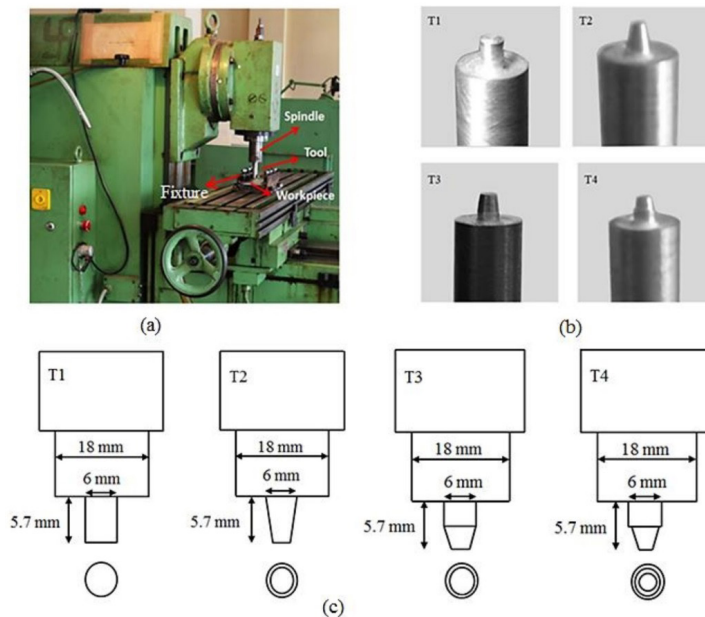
(a) Experimental setup; (b) Tool pin-profiles: Cylindrical pin tool (T1), conical pin tool (T2), cylindrical-conical pin tool (T3), and stepped-conical pin tool (T4); (c) Schematic diagram of the FSW tool
